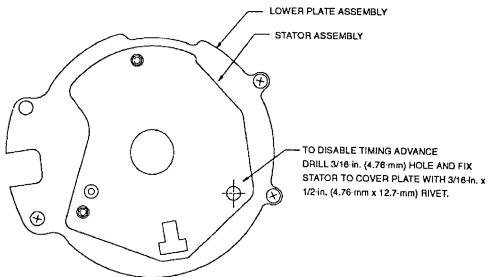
Modified Ford Distributor-Stator Assembly
